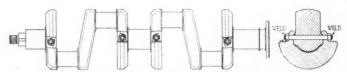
Mack case-hardened crankshaft, showing method of attaching counterweights
